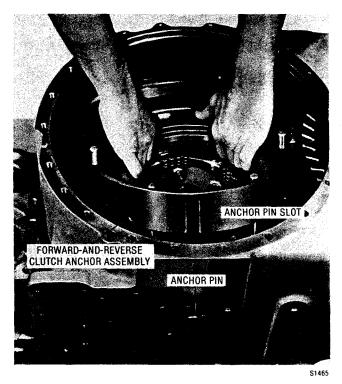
Removing forward-and-reverse clutch anchor assembly
